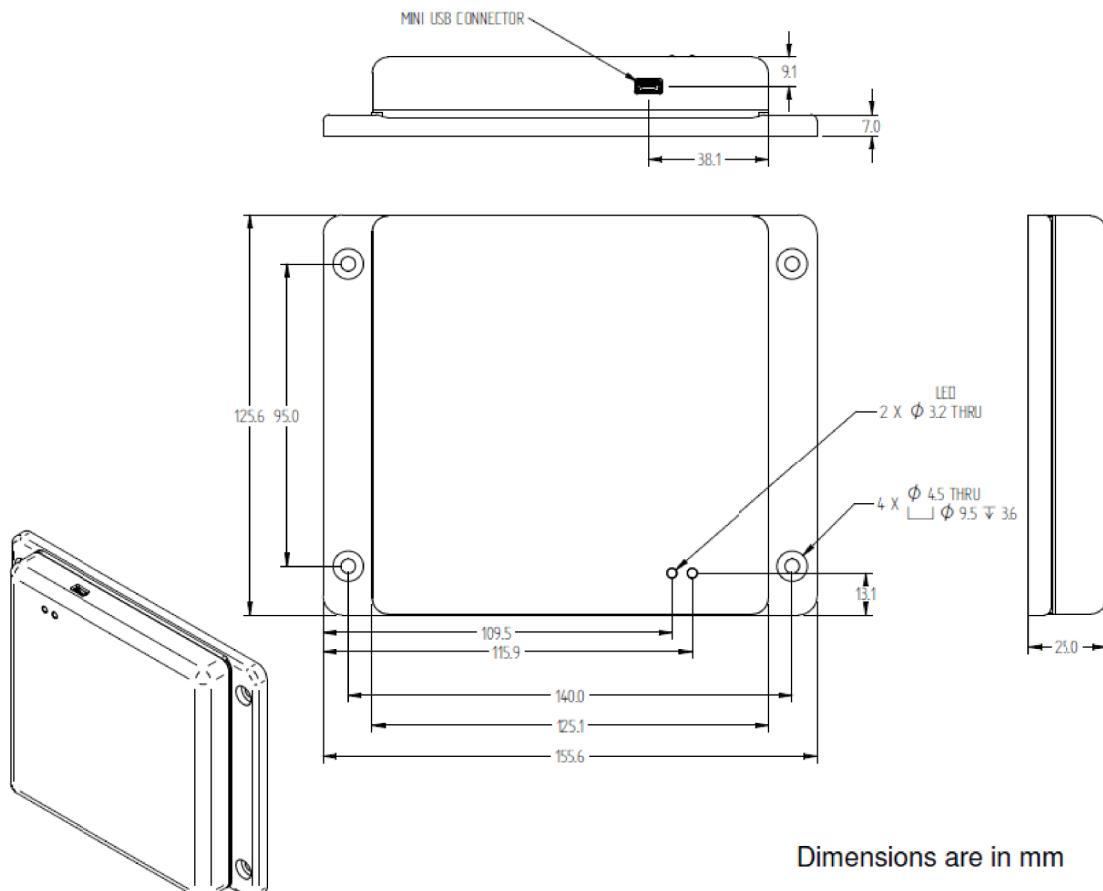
Tile R1250I (flanged enclosure) mechanical drawing
